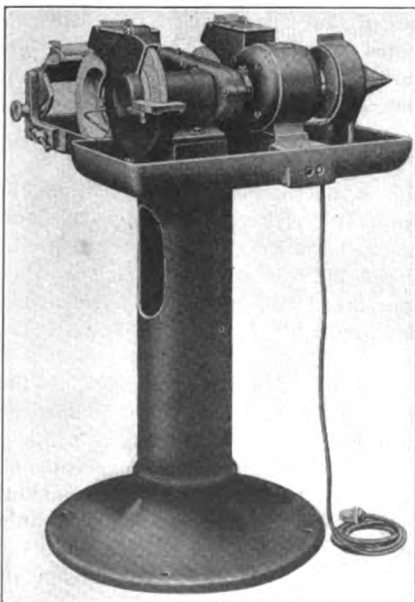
SELF-CONTAINED GRINDER EQUIPPED WITH FOUR WHEELS
